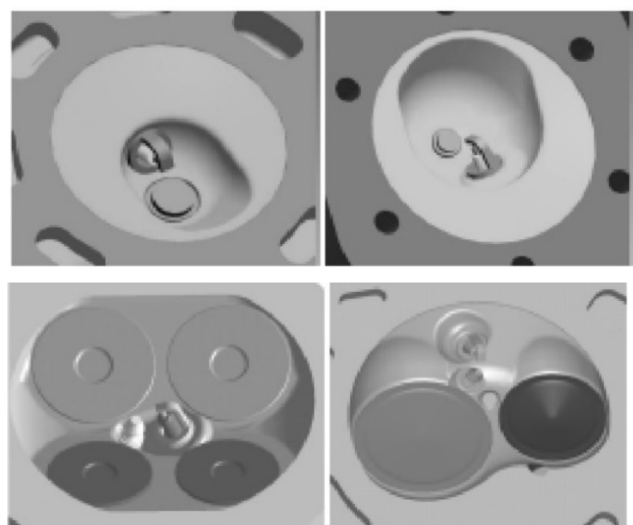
Examples of a typical construction of the cylinder head in an engine with ADDI system: 2-stroke (top), 4-stroke (bottom) [5]
